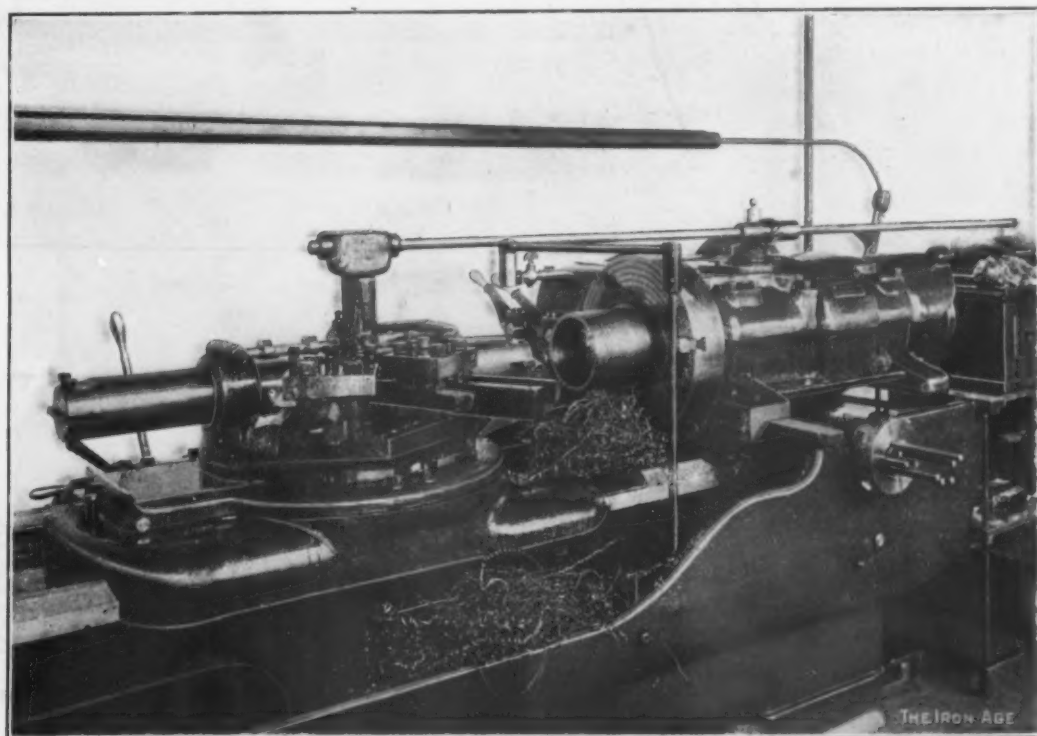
The Automatic Screw Chasing Attachment Applied to a Hartness Flat Turret Lathe, as Made by the Jones & Lamson Machine Company, Springfield, Vt.
